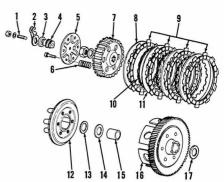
Exploded view of clutch used on 100cc models. Refer to Fig. Y3-17 for 125cc models.
